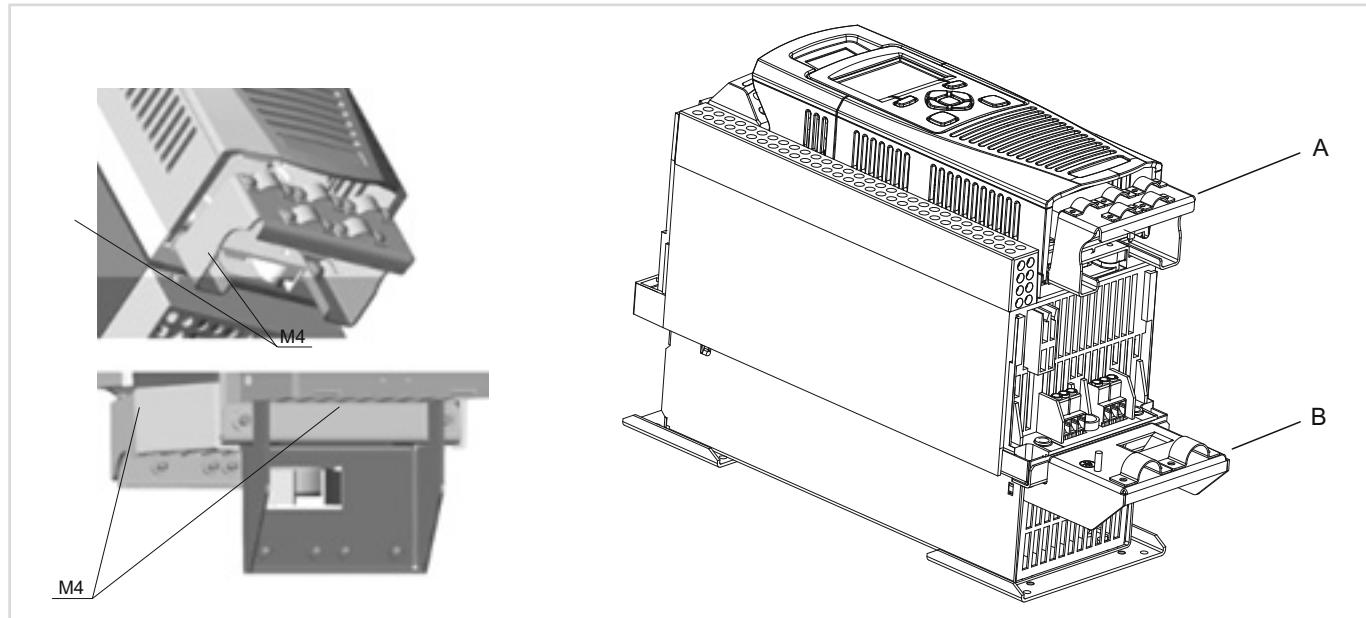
Mounting the fixtures for power connection cables and control cables using the example of FEU+16 for switch cabinet mounting
